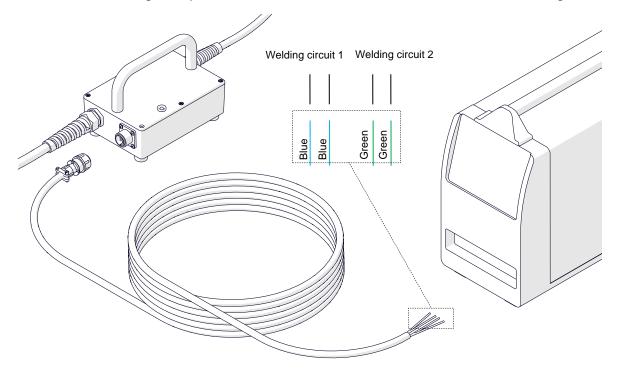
Connecting the arc ignition cable to welding circuits
